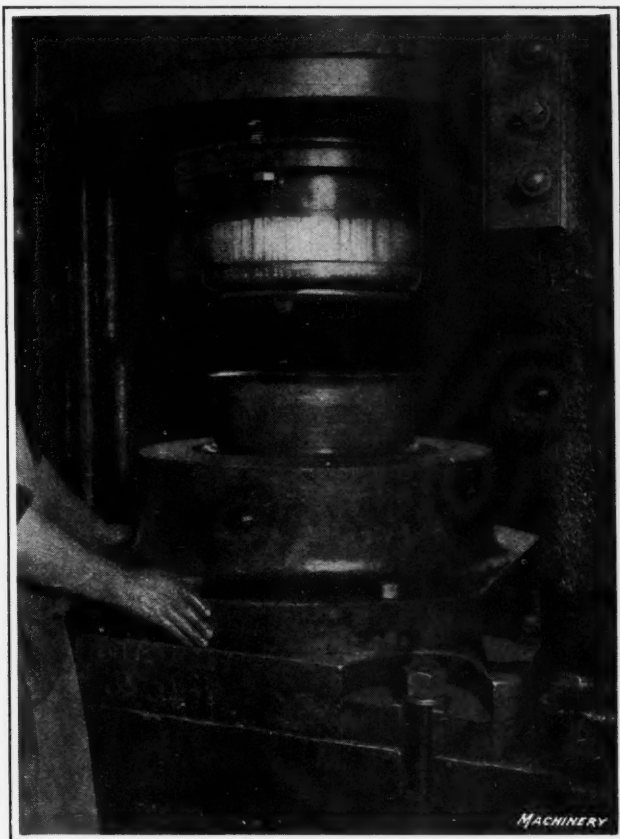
Double-gear Power Press equipped for performing Third Operation on Seamless Kettles
